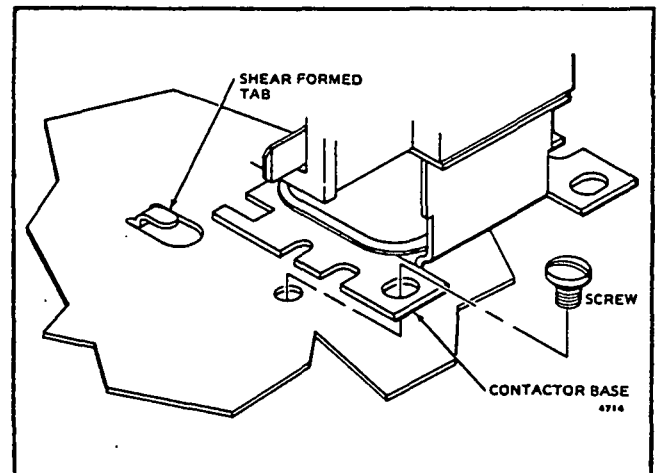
MOUNTING RELAY ON PANEL WITH SHEAR FORMED TAB AND 1 SCREW.
